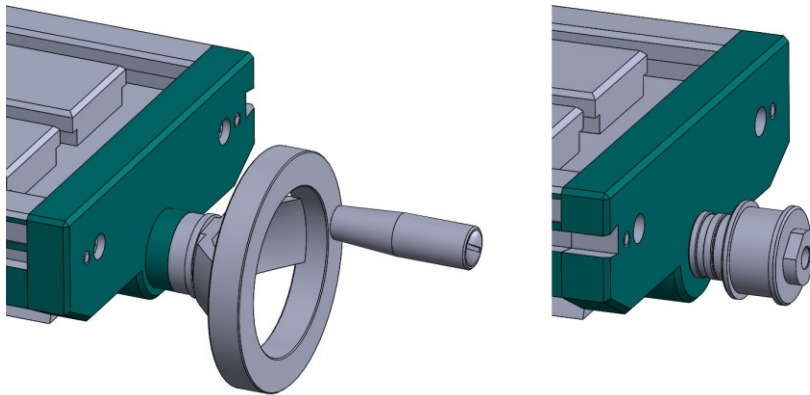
The configuration of the X-axis screw before (left) and after (right) the removal of the hand wheel and the installation of the pulley
